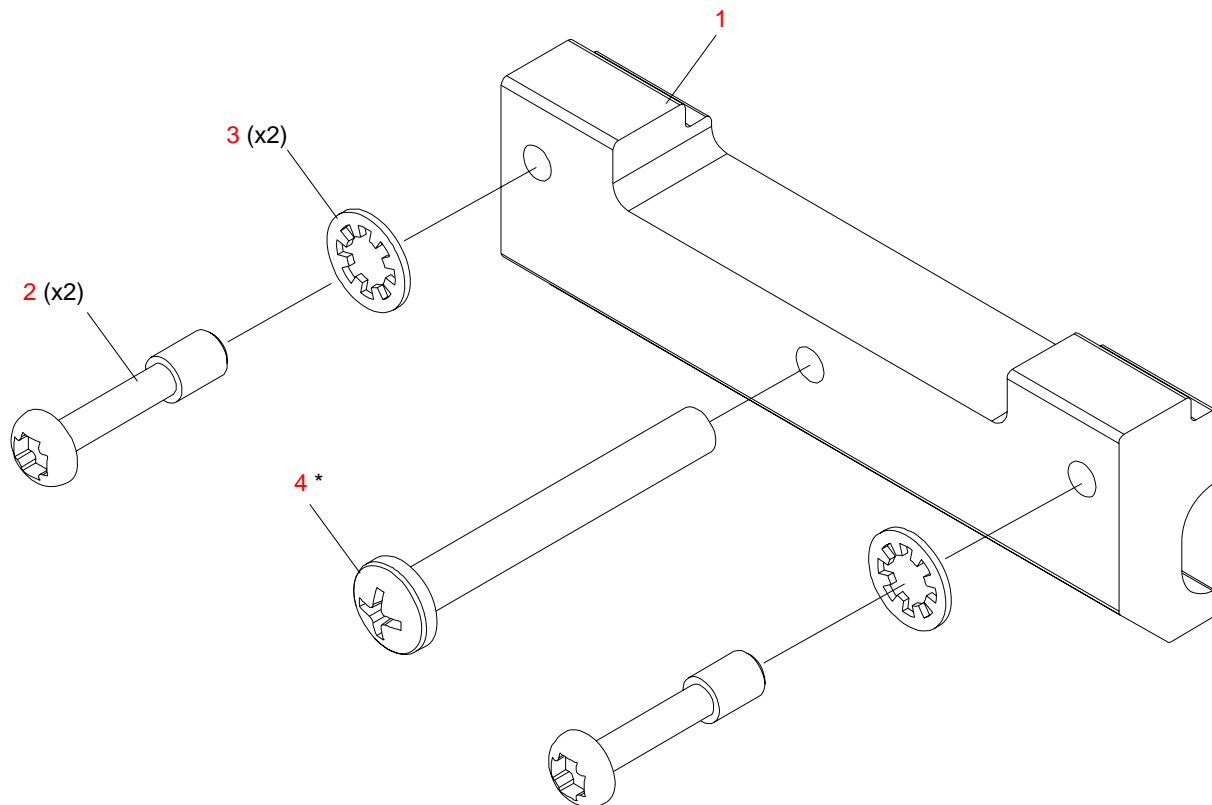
Gobo Clamp (with Cover Support) Assembly
